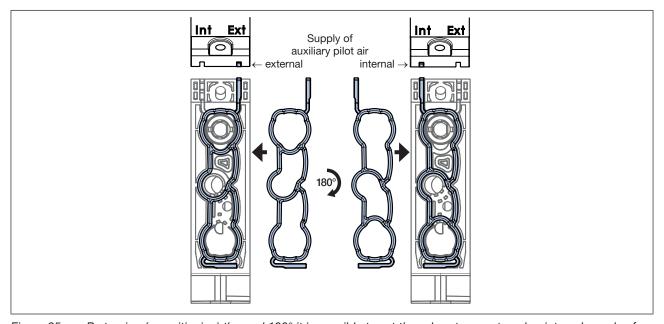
By turning (repositioning) the seal 180° it is possible to set the valves to an external or internal supply of auxiliary pilot air. The type of supply must always be the same inside the valve island!
